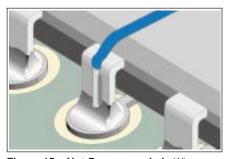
Not Recommended* Wire soldered to lead, wire over component.
